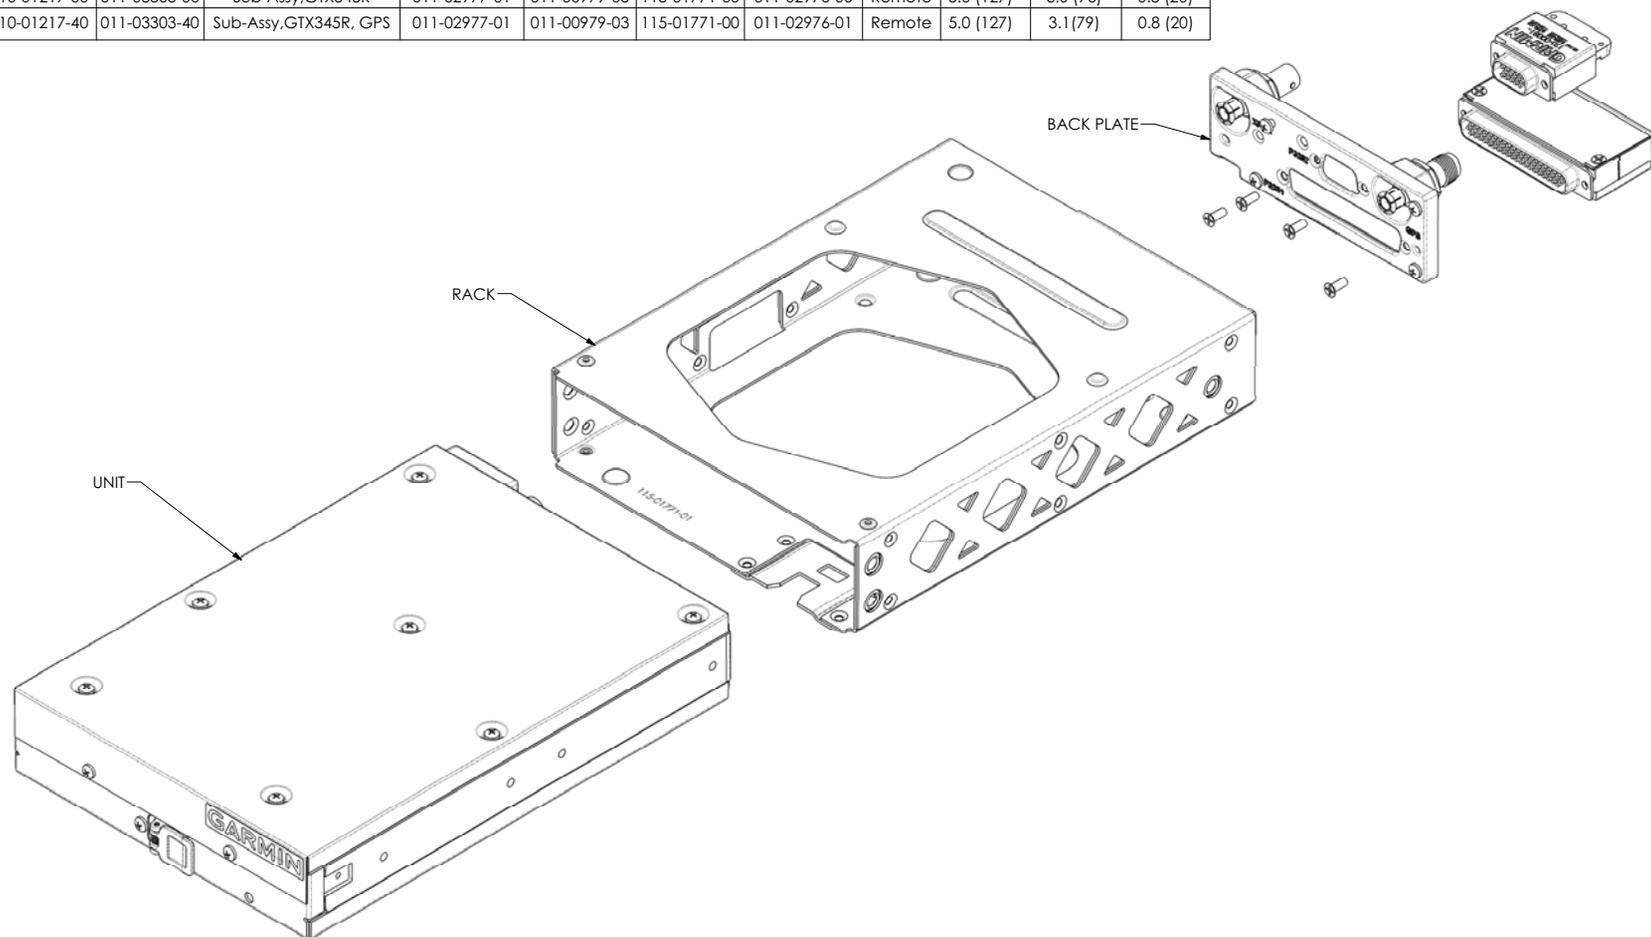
GTX 3X5 Panel Mount Rack Assembly
